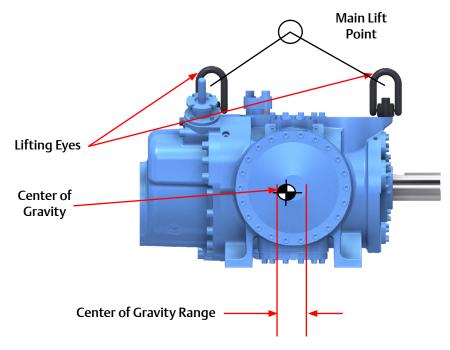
Bareshaft Compressor Assembly Center of Gravity (Models 291-601)
